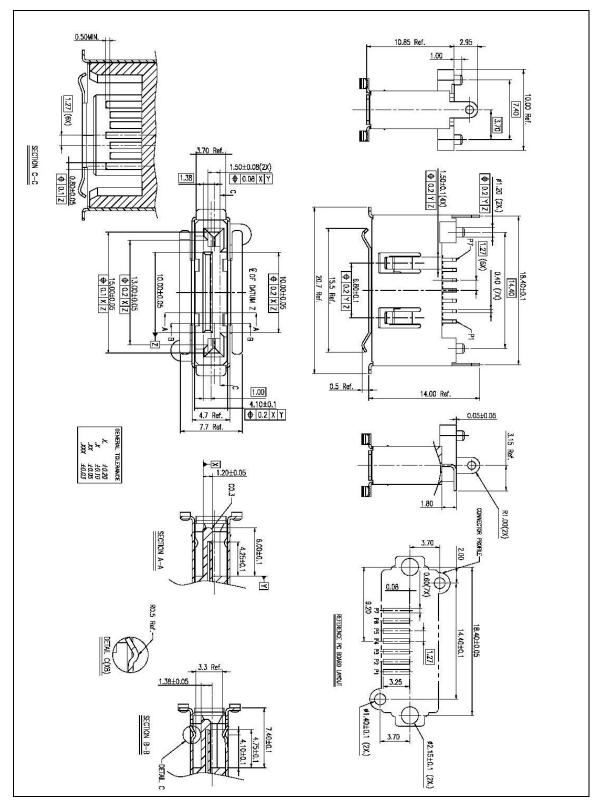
Mechanical dimensions of External Serial ATA vertical SMT plug
